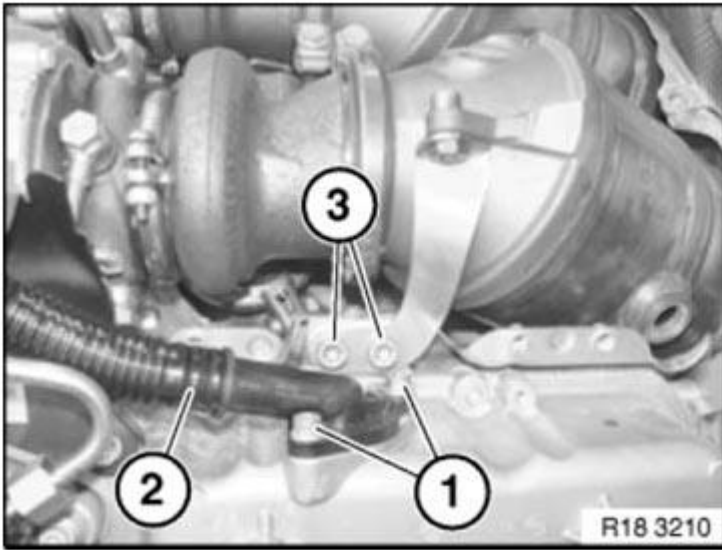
Identifying Hose Of Cylinder Head Cover And Screws On Holder
